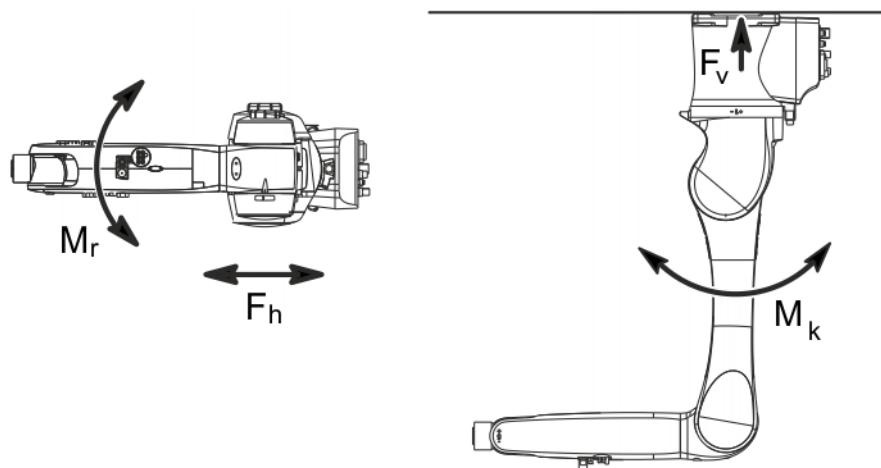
Loads acting on the foundation, ceiling mounting
